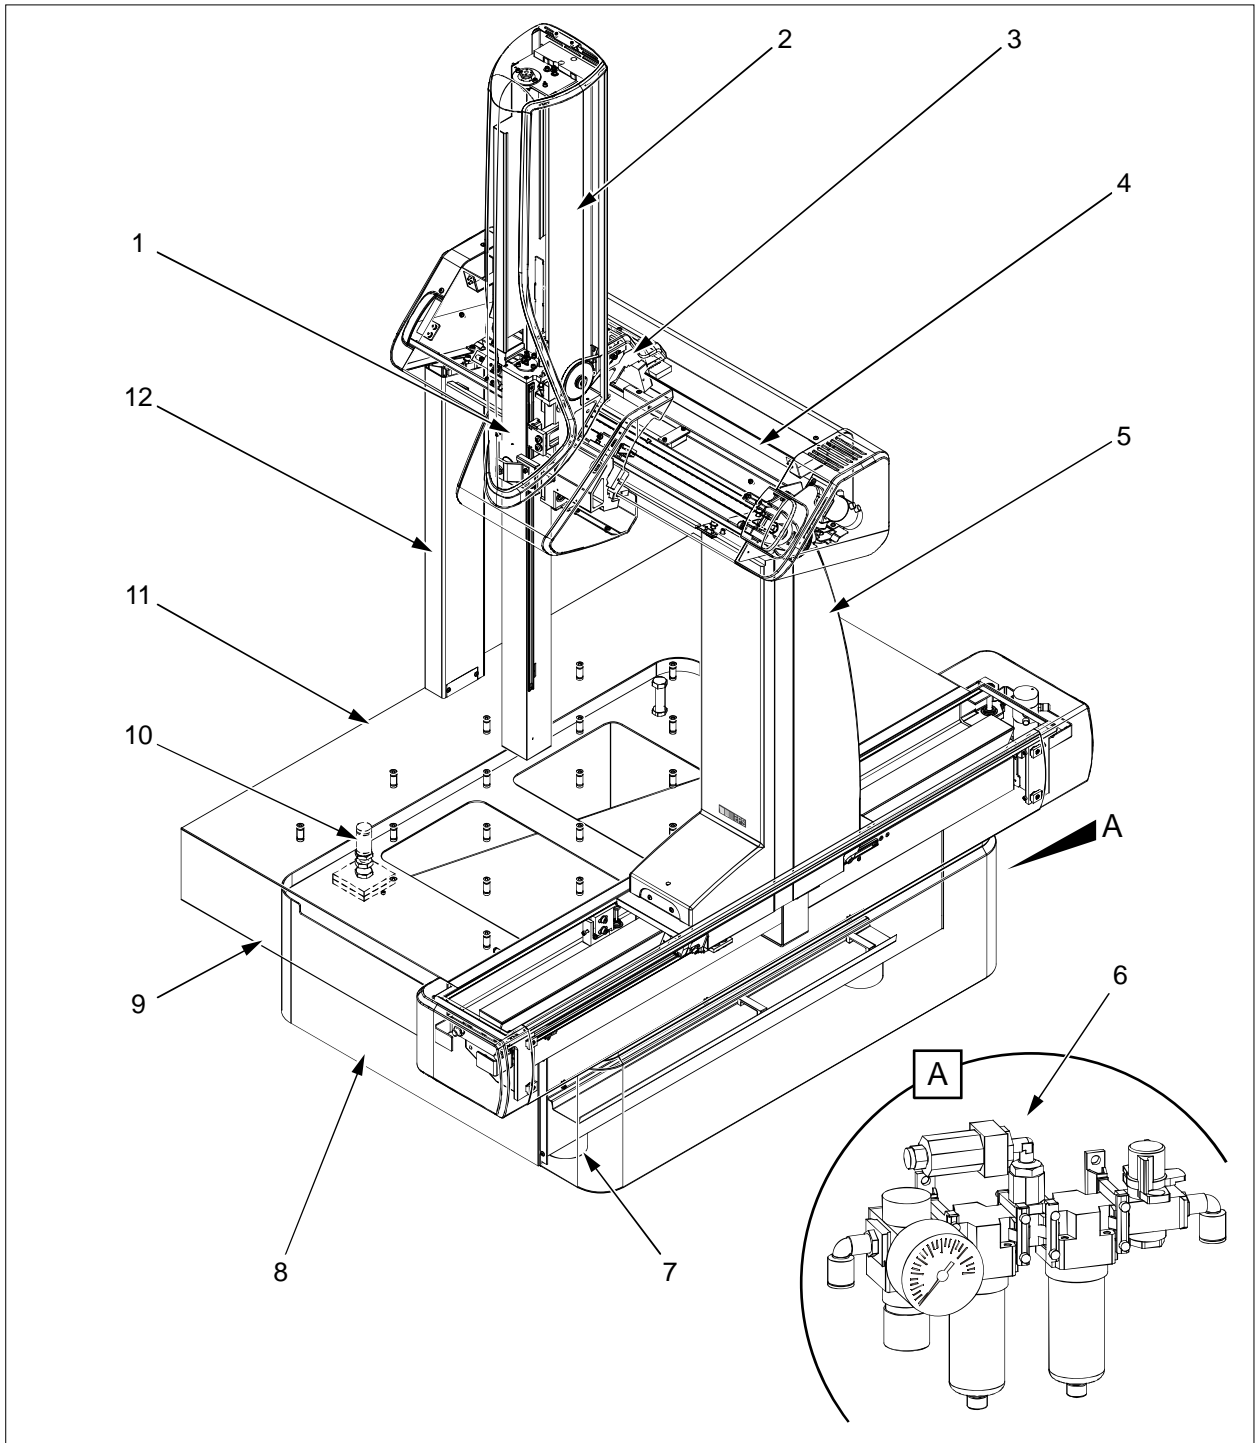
Components of the Measuring Machine 5.yy.05 and 7.yy.07 Models
